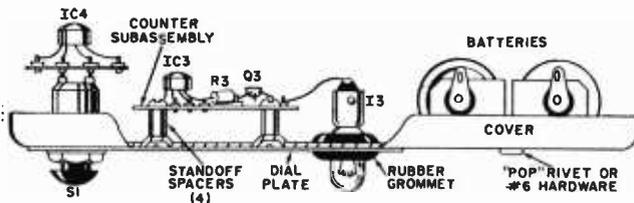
This cutaway view of the front cover shows how the subassembly is mounted on the spacers. Observe that the mounting screw holes are recessed a bit so the dialplate can lay flat on the cover assembly.
